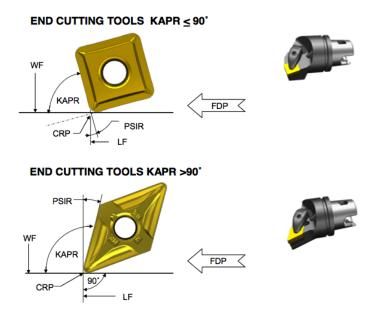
Cutting Tool Measurement Diagram 5 (Cutting Item – ISO 13399)
